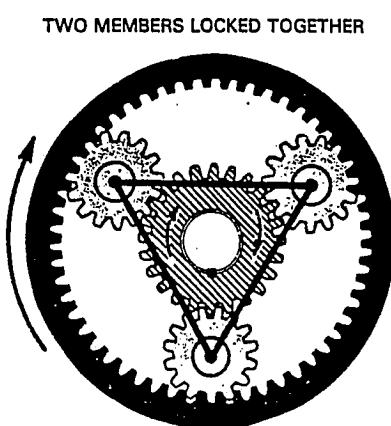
Planetary gearset in direct drive. (Cadillac)
